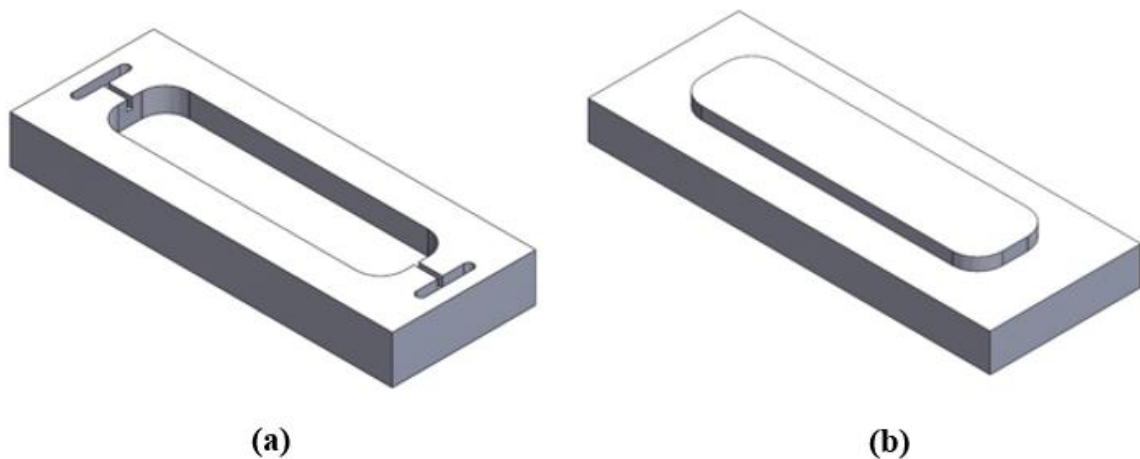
(a) Test Mold Bottom, (b) Test Mold Top
